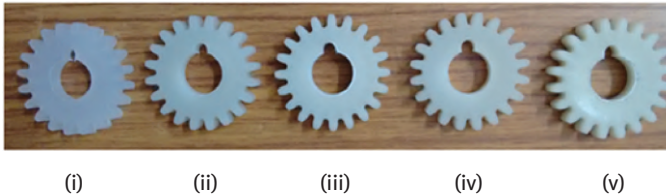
A pictorial view of fabricated samples: (i) neat PA66 gear, (ii) FGM gear filled with 15 wt% glass fiber, (iii) FGM gear filled with 30 wt% glass fiber, (iv) homogeneous gear filled with 15 wt% glass fiber and (v) homogeneous gear filled with 30 wt% glass fiber.
